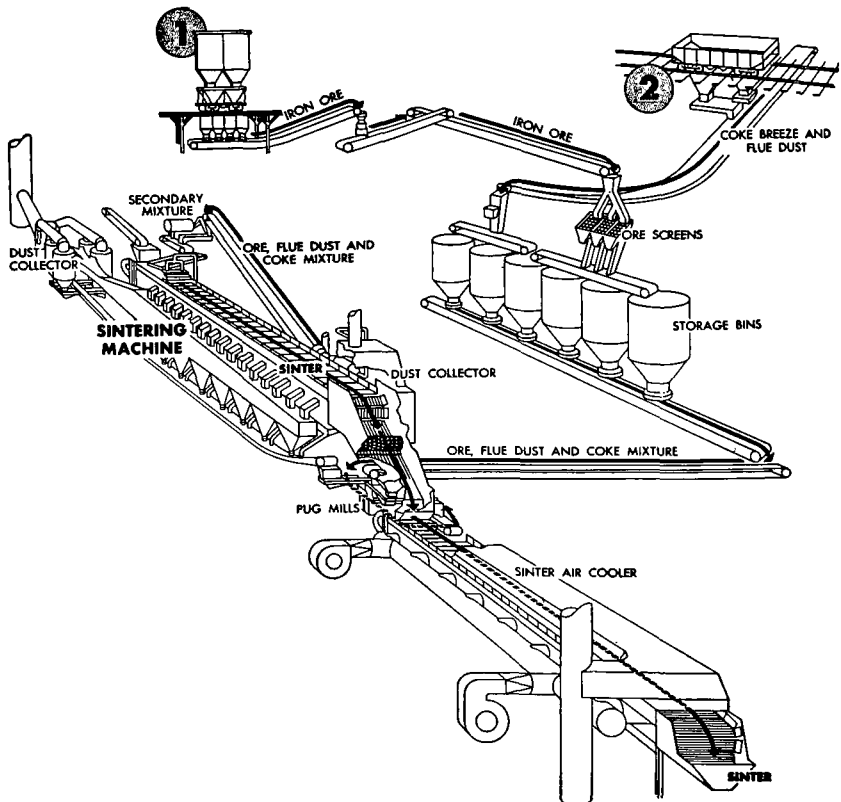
Schematic of a sintering machine. (Courtesy of Mechanical Engineering, ASME)
